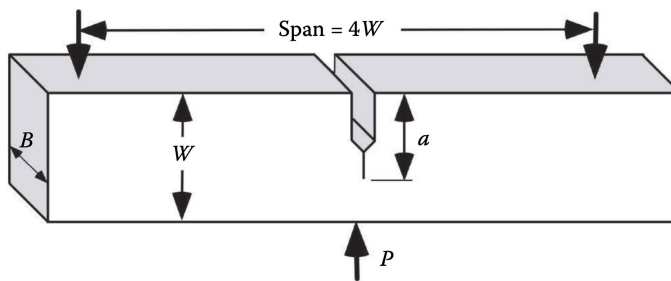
SE(B) fracture test specimen geometry, adapted from [Anderson, *Fracture Mechanics : Fundamentals and Applications*]
